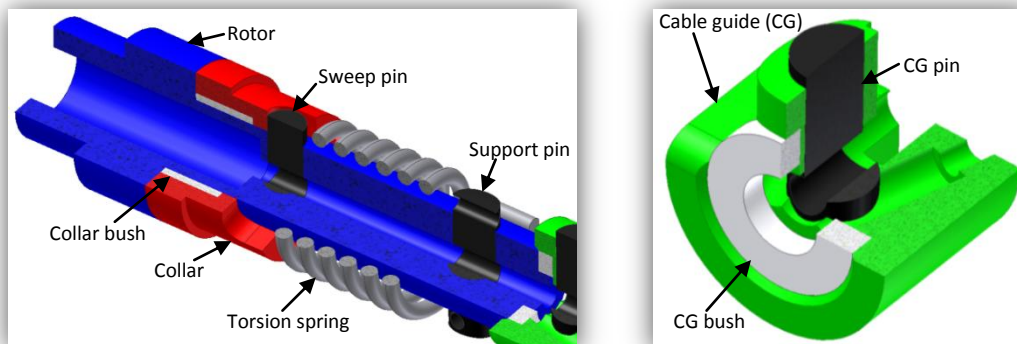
Sectional views of Rotor Assembly (left) and Cable Guide Assembly (right)
